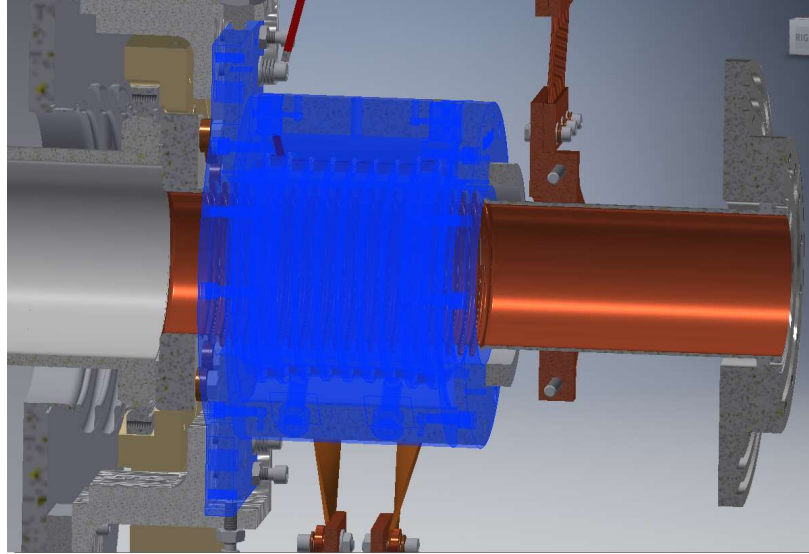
Solenoid body (highlighted in blue) is supported by the cavity jacket. Beam tube is supported by the end flange and from the cavity flange. Removal from cavity flange required sliding the solenoid body over the beam tube to the right.
